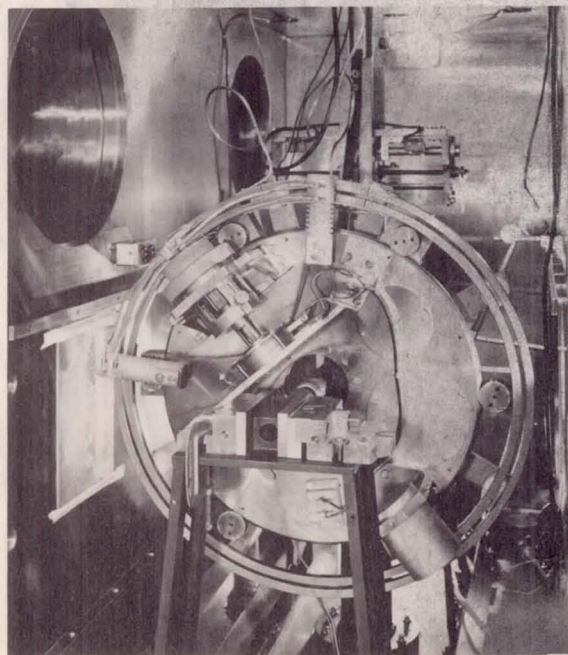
Welding fixture for columbium—1-percent-zirconium liquid-metals heater. Electron-beam welding.
